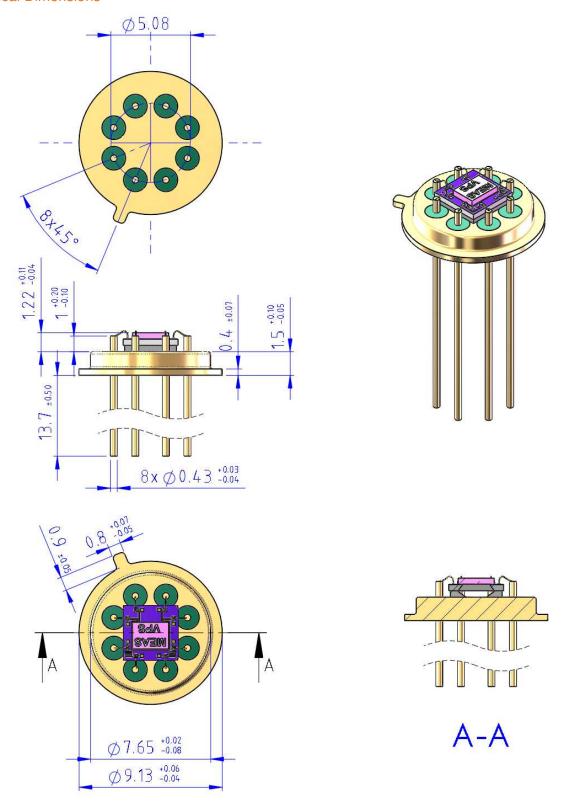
Mechanical dimensions of sensor – all dimensions in mm
